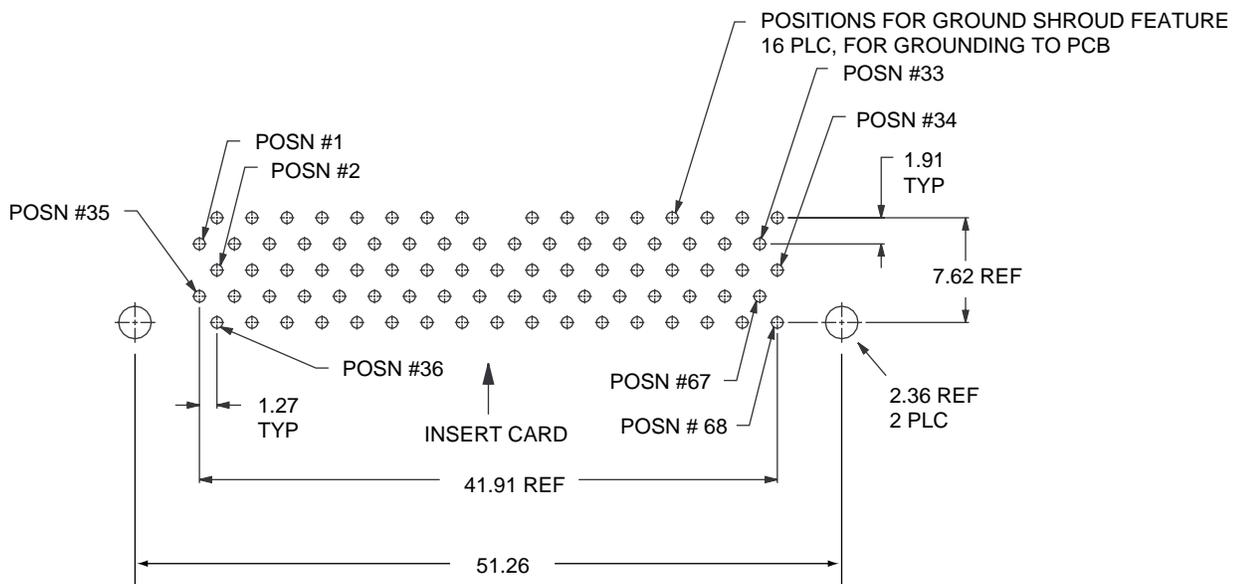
CardBus PC Card Recommended Right Angle PCB Footprint
